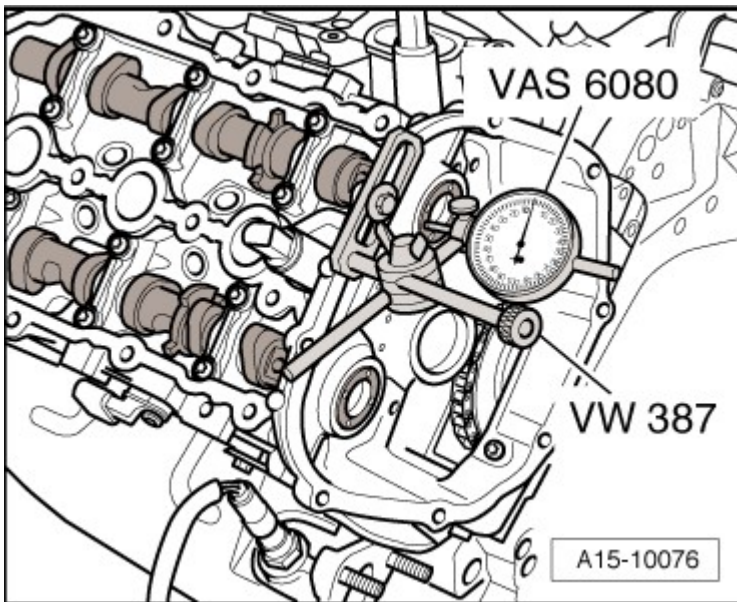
Securing Dial Gauge Holder VW 387 To Dial Gauge VAS 6080 On Cylinder Head
